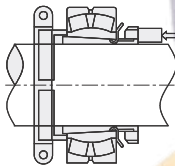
Removal of Adapter with Stop and Axial Pressure
